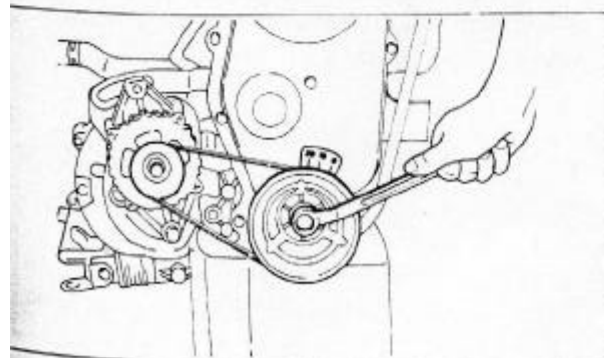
A — 23 REMOVAL OF CRANK PULLEY
